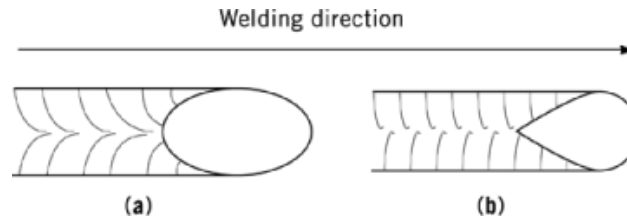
Weld pool shape and resultant weld-metal solidification direction. (a) Slow welding speed. (b) Rapid welding speed.
